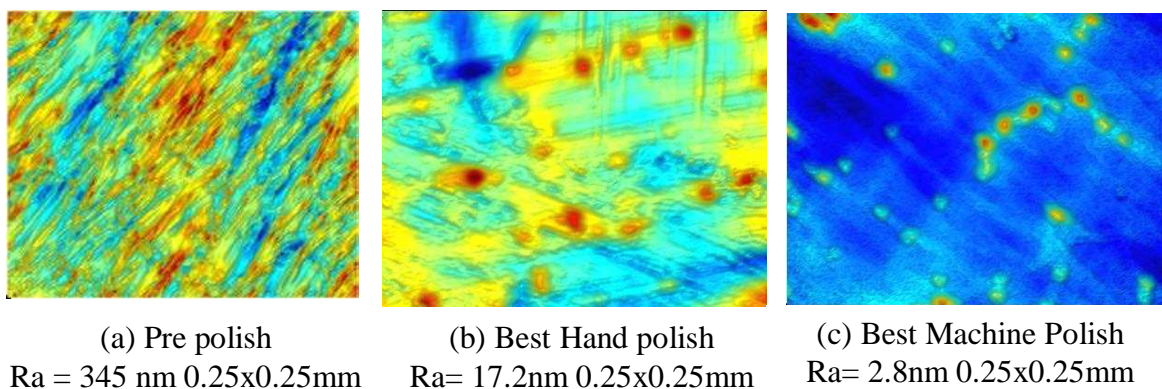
Best Machine and Hand Polished Pin Surfaces Pre-Wear Testing
